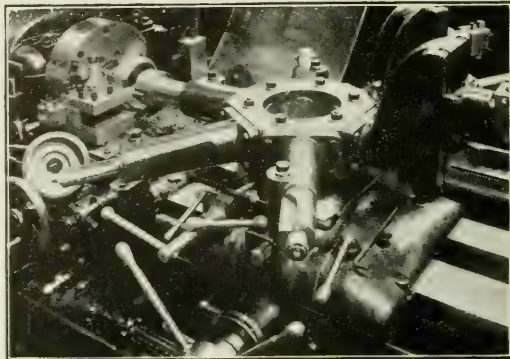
PHOTOGRAPH OF THE FIRST OPERATION ON CLUTCH GEAR.
